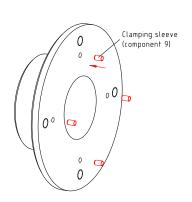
Assembly of clamping sleeves (component 9) (Type D2H)
